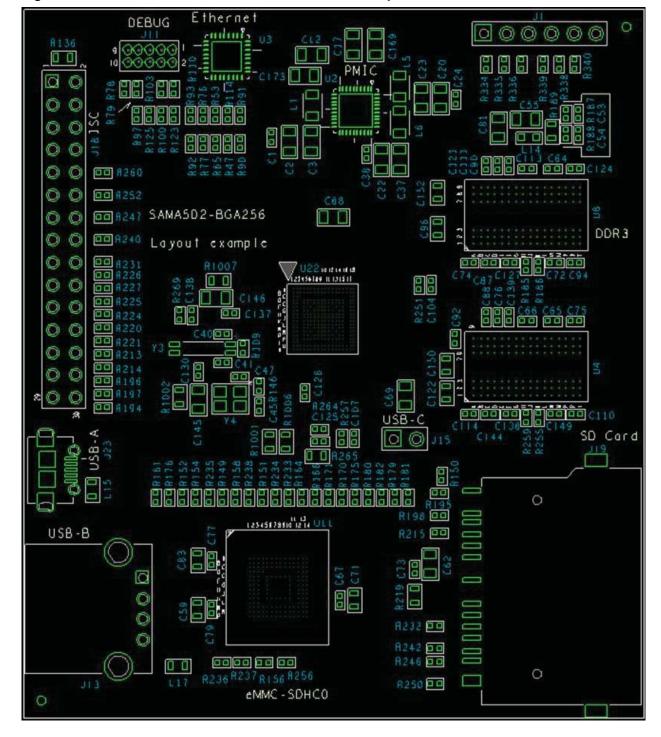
SAMA5D2-BGA256 8L Board Placement Example
